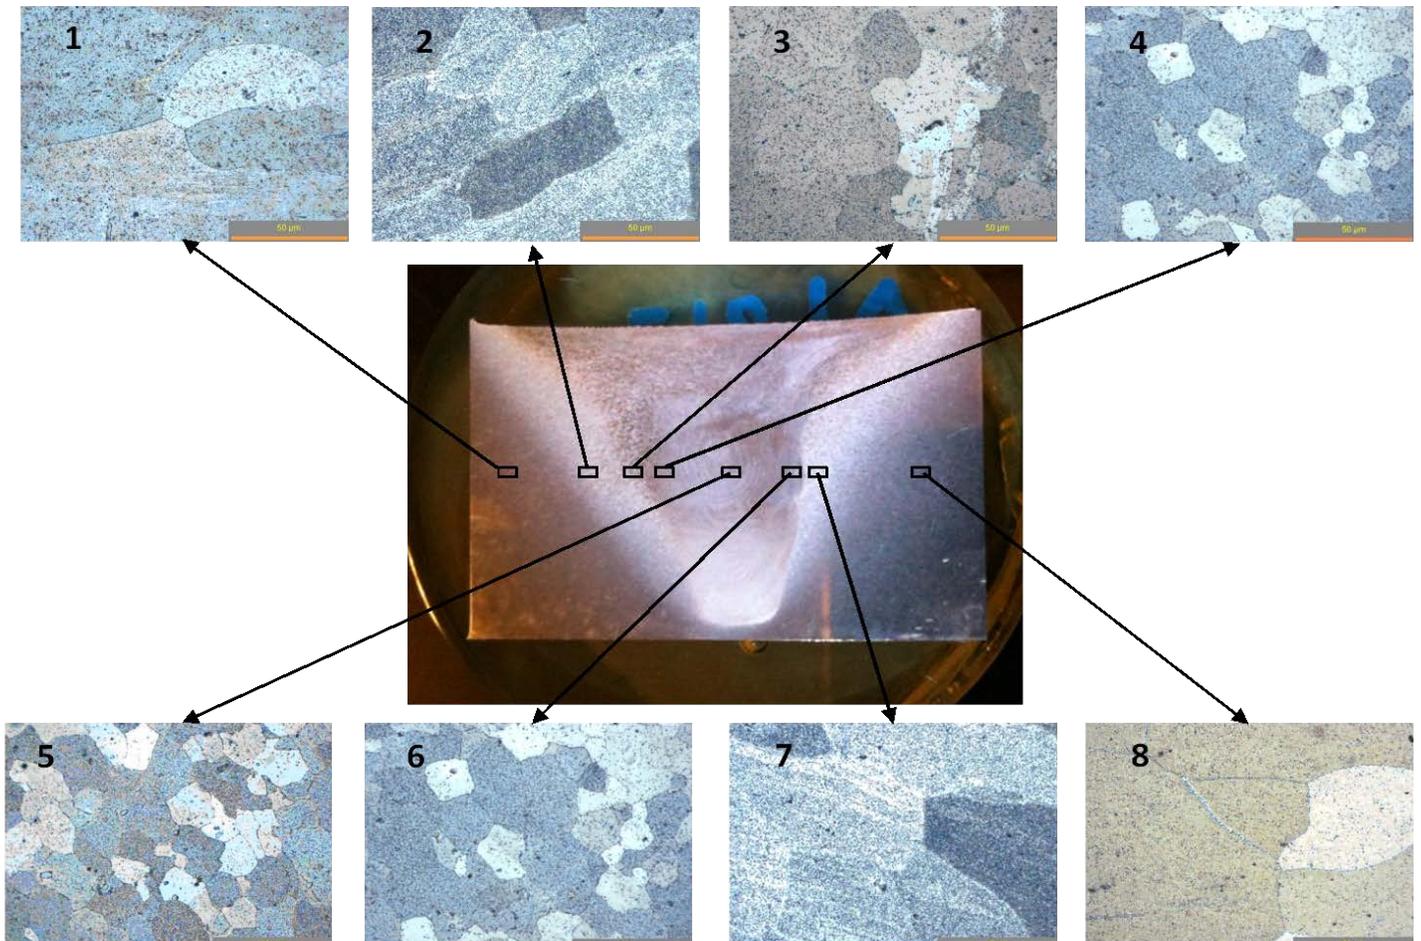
Microscopic Views of 2139 FSW Joint.
